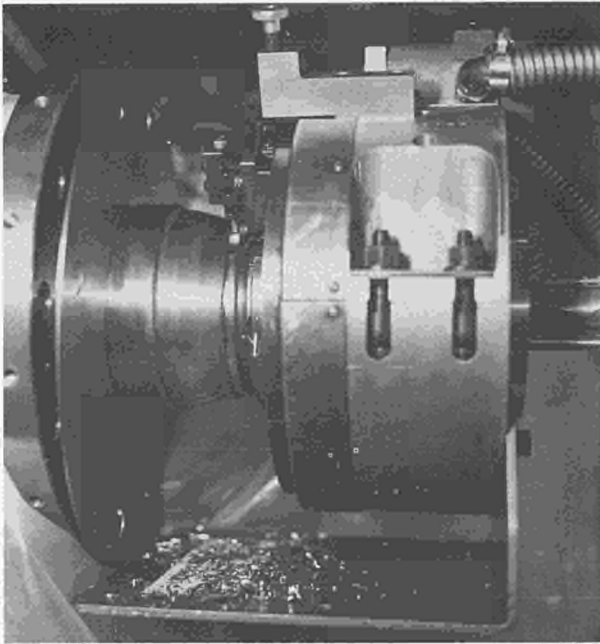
Cutting limiter seal welds with modified orbital lathe.
